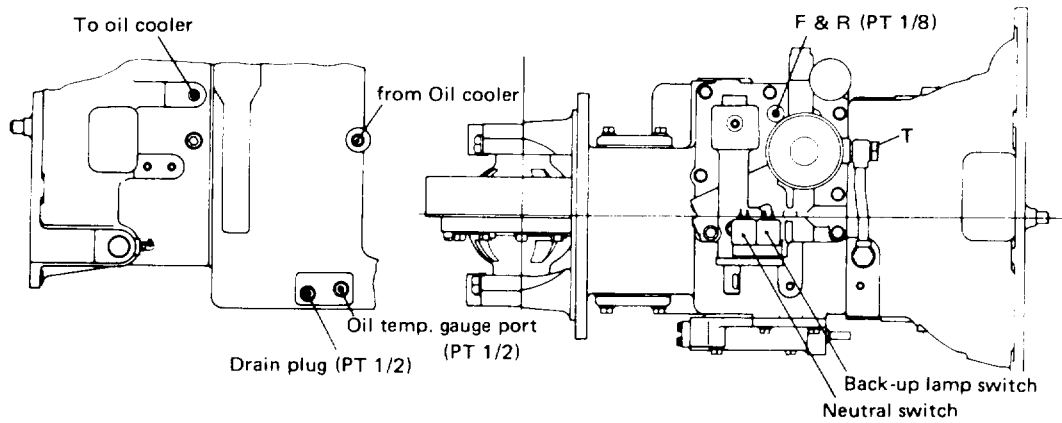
Torque Converter and Clutch Oil Pressure Inspection Hole Plugs
